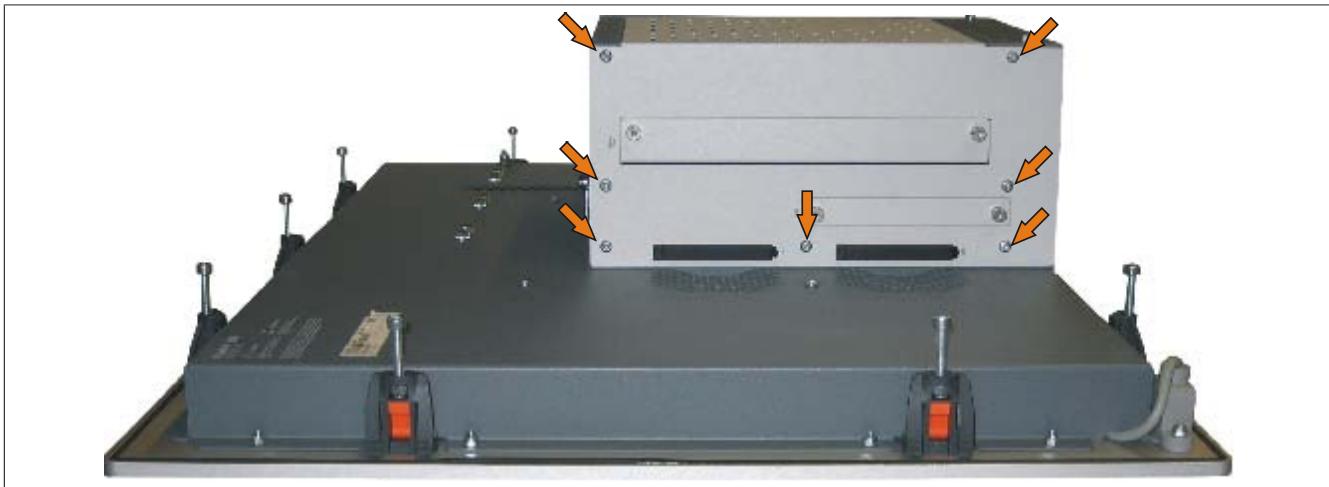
Mounting the side cover on a PPC800 with expansion (1 slot expansion shown in image)
